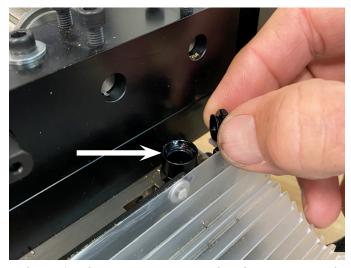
The arrow is pointing to the oiler reservoir on the mill and chucker lathe saddles. Remove the screw cap to fill the reservoir.
